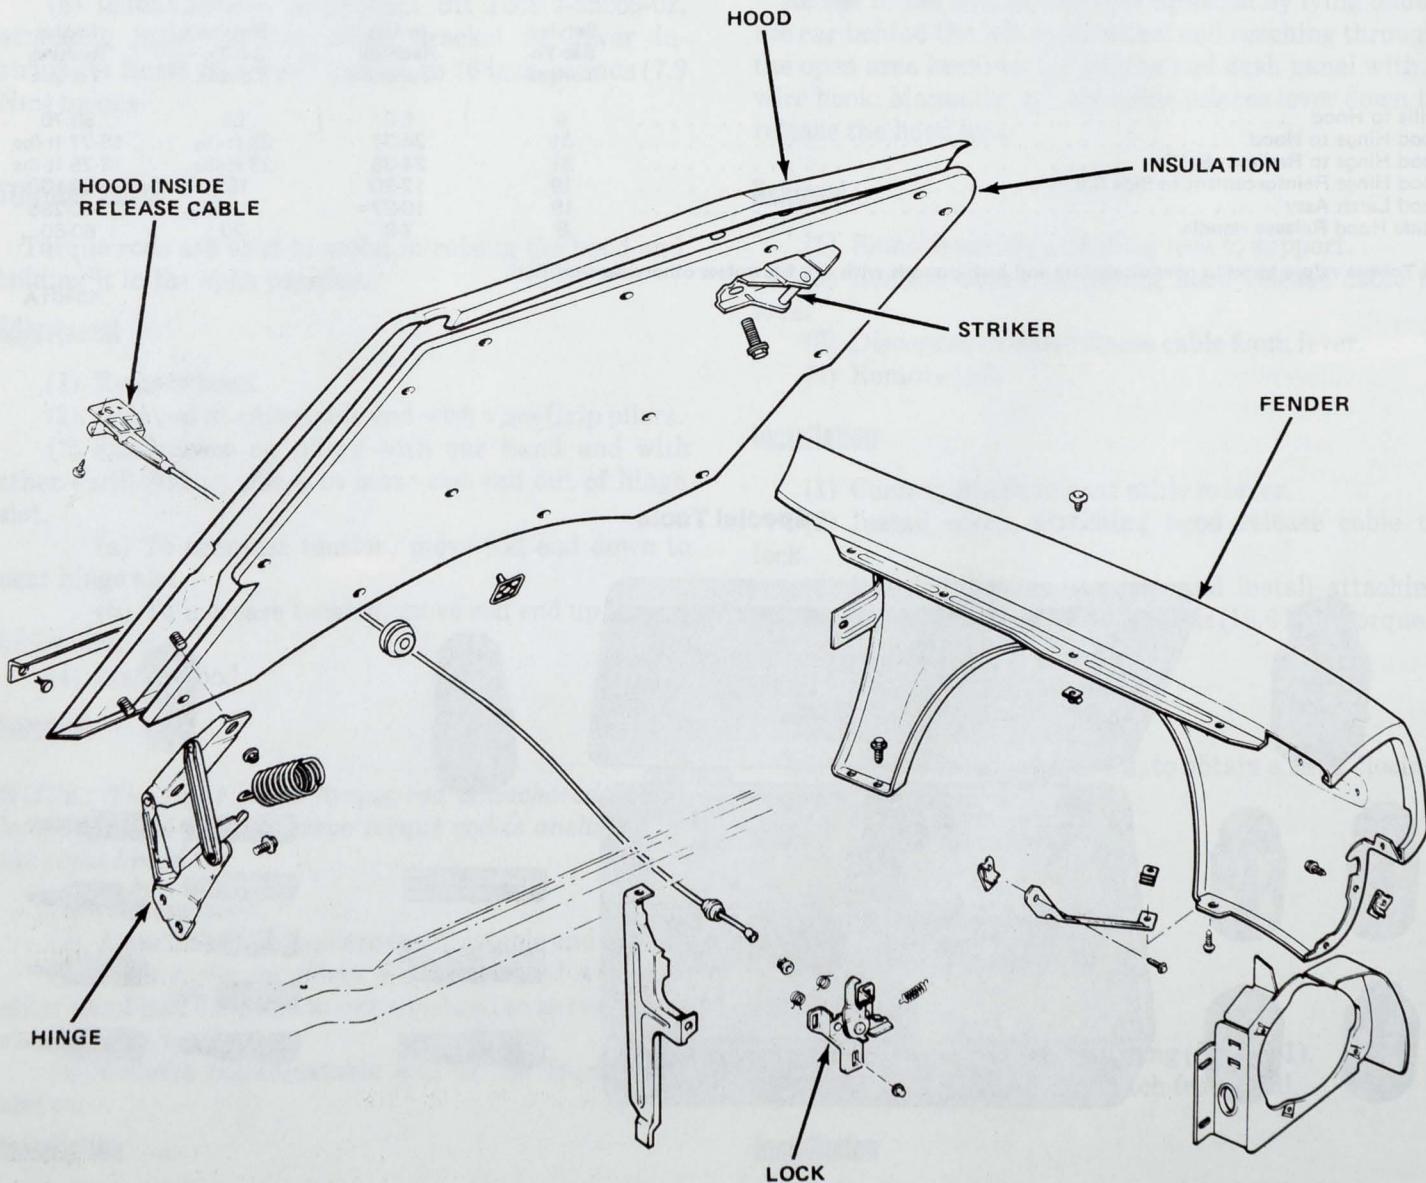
G-2 Front Fender and Hood Components—Gremlin
